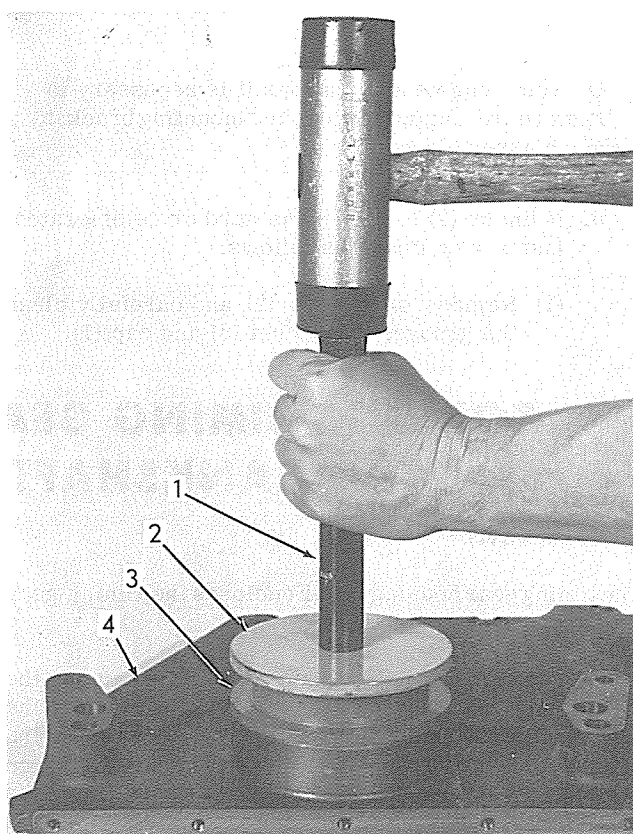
Installing Crankshaft Front Oil Seal (T-71021)
